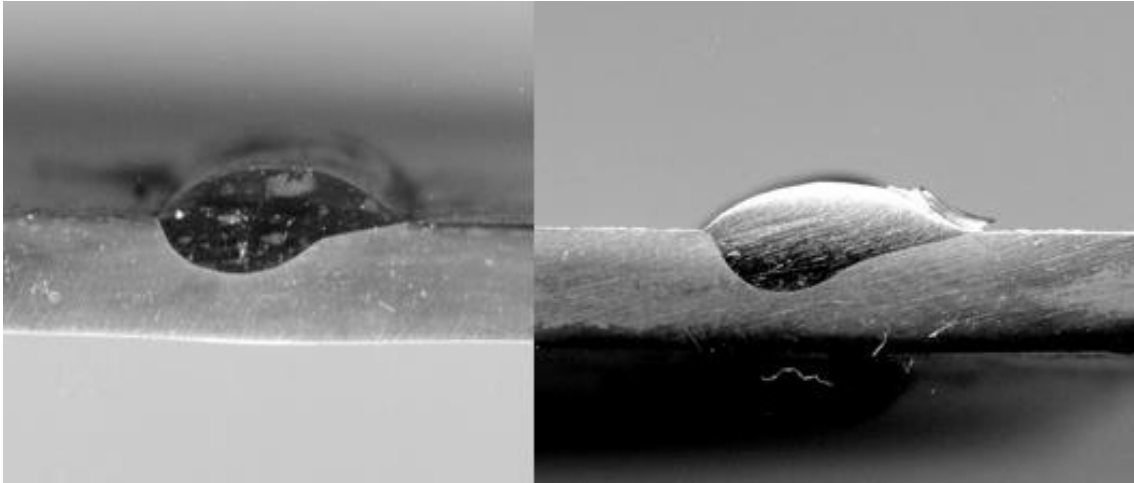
Cross-section of the experiment welds. The left cross-section is for 100% argon shielding gas while the right cross-section is for a mixture of 5.26 % nitrogen and 94.74% argon shielding gases.
